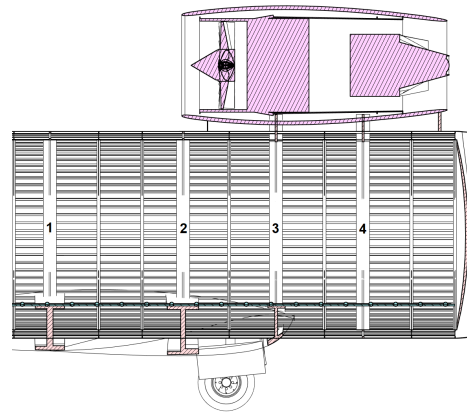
Engine and wing mounting points, making use of conventional frame, stringer and longeron structure.
